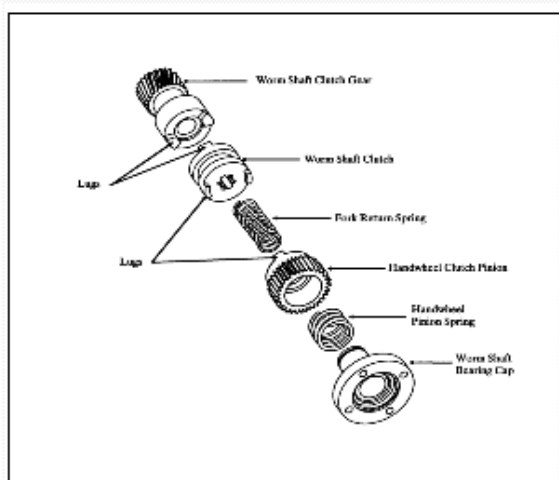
SMB/SB-0 Worm Shaft Clutch
